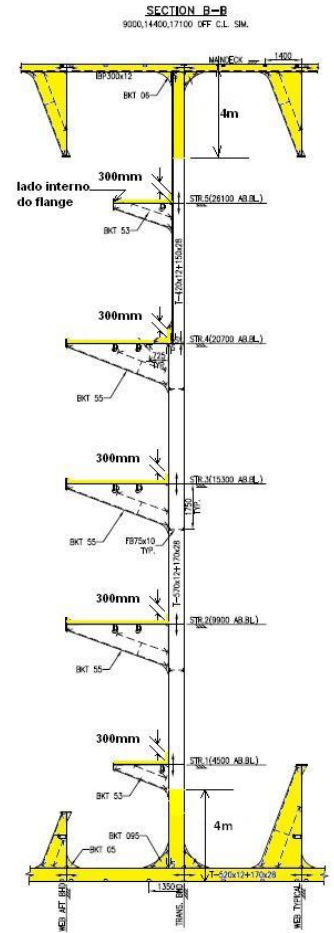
Transverse bulkhead horizontal stringers and stiffeners, longitudinal and tripping brackets - transverse view
